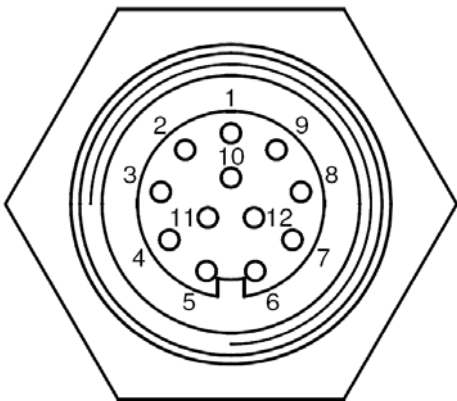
Layout of 12-pole (I/O) Control Module connector (chassis front view).
